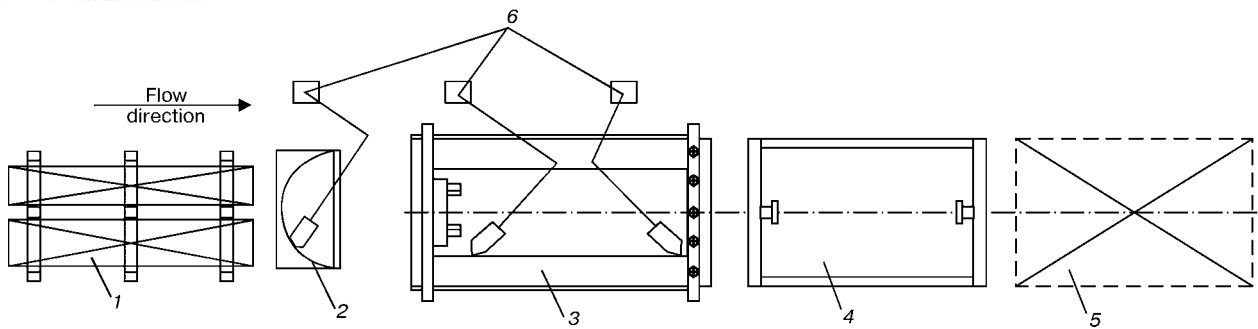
Layout of equipment in the line for roof manufacturing: 1 — storage position for sheet rolled stock; 2 — bench for assembly and welding of transoms; 3 — installation for assembly and welding; 4 — bench for testing welded joints tightness; 5 — storage position for finished items; 6 — two-arc consoles with feed mechanisms of semi-automatic welding machines
